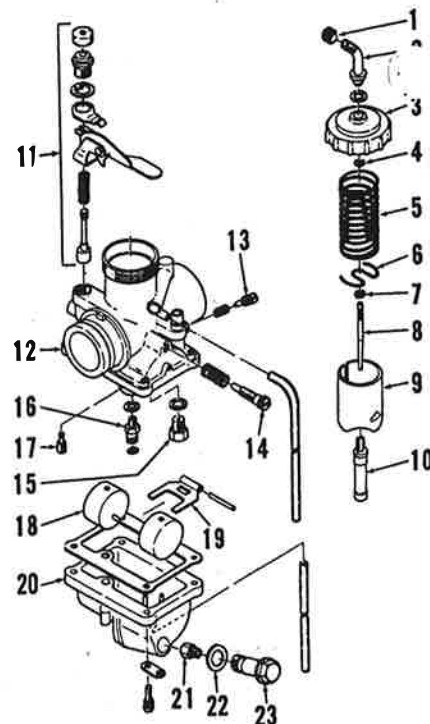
Exploded view of typical Mikuni carburetor assembly.
